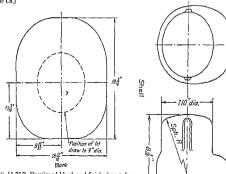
D. Developed blank and finished part, for the dies of Figs. 11-36A, 11-36B, and 11-36C.
